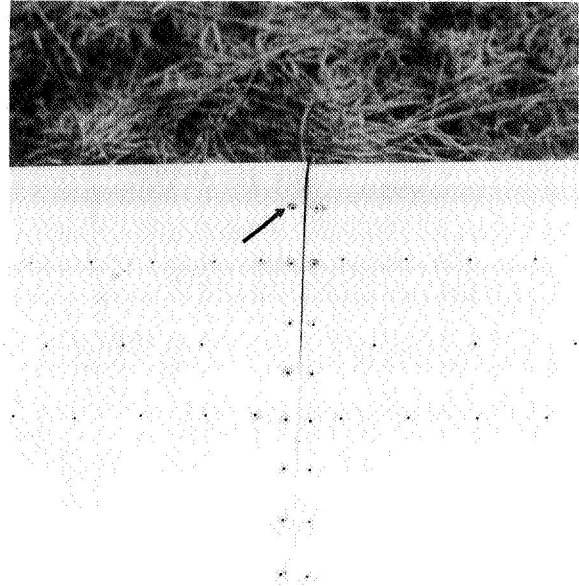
An example of how skin movement caused rivet pullthrough. (arrow)
